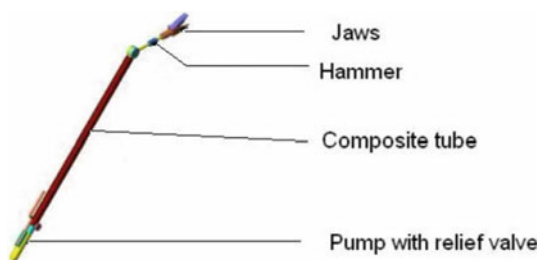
Photo of the prototype mechanical “jaw” assembly
